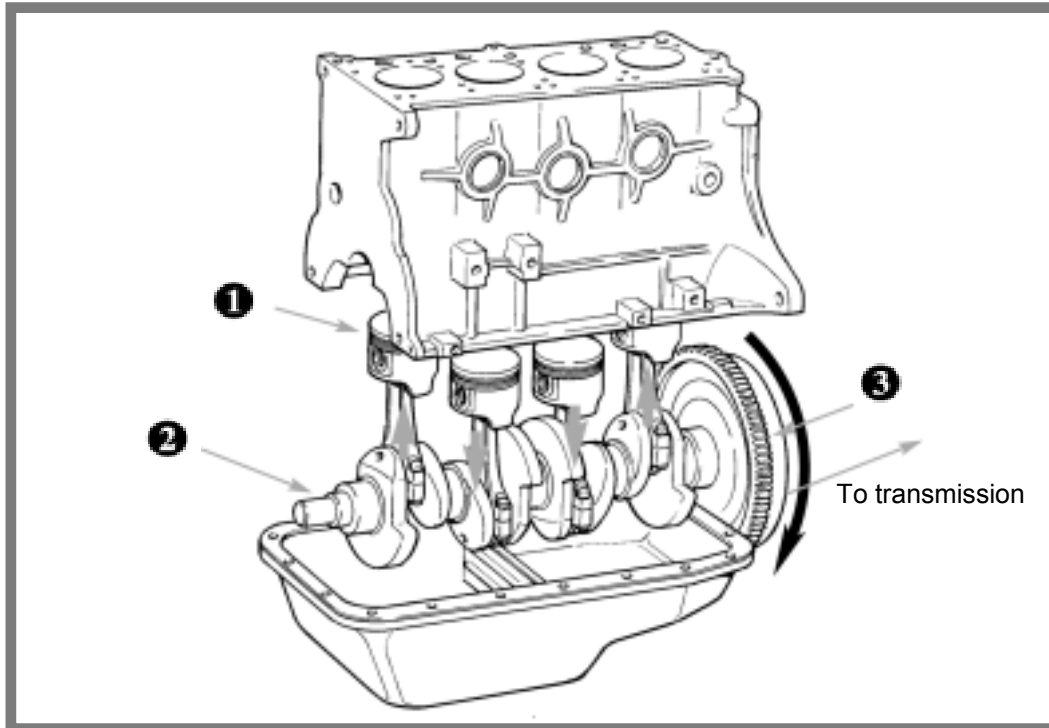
The flywheel keeps the crankshaft turning smoothly.
